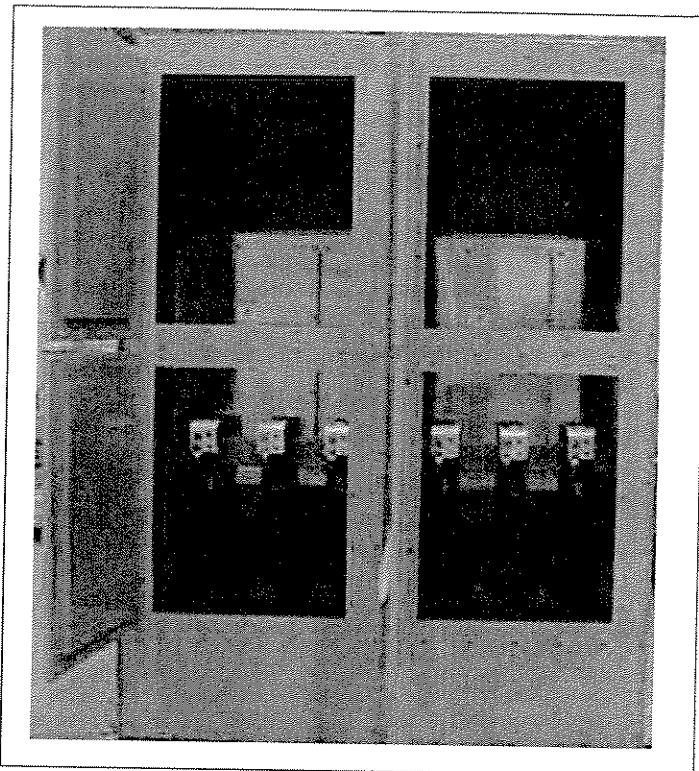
Assembled Switchgear (Shown with Rear Doors Opened).
